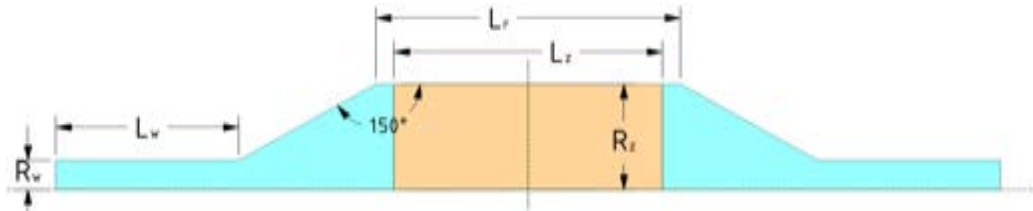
The view of the upper axial section of the TES unit with all dimensions.
